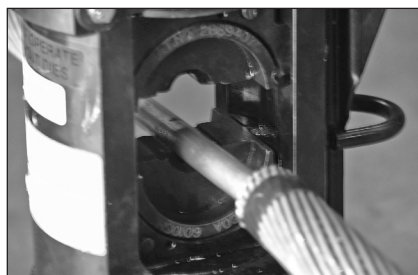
Use of a cable trimming tool is recommended.
